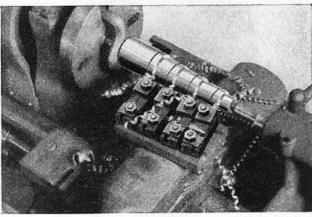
Multiple Tool Block on 16-inch New Model Lathe Turning 4 Different Diameters
